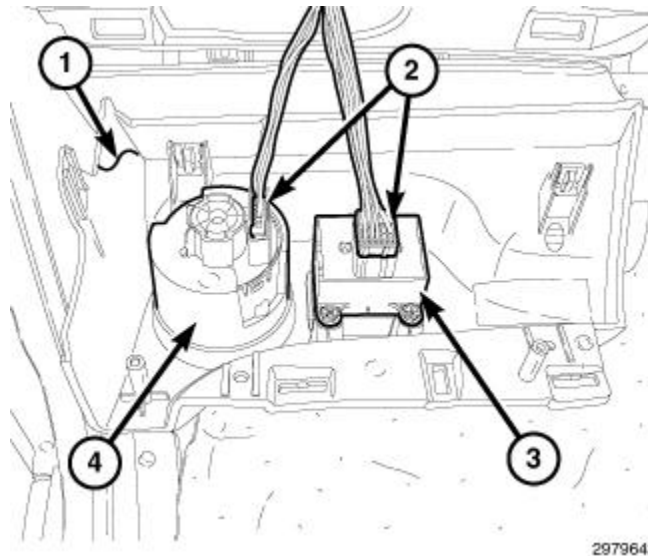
Trim Molding, Wire Harness Connector & Dimmer Module
